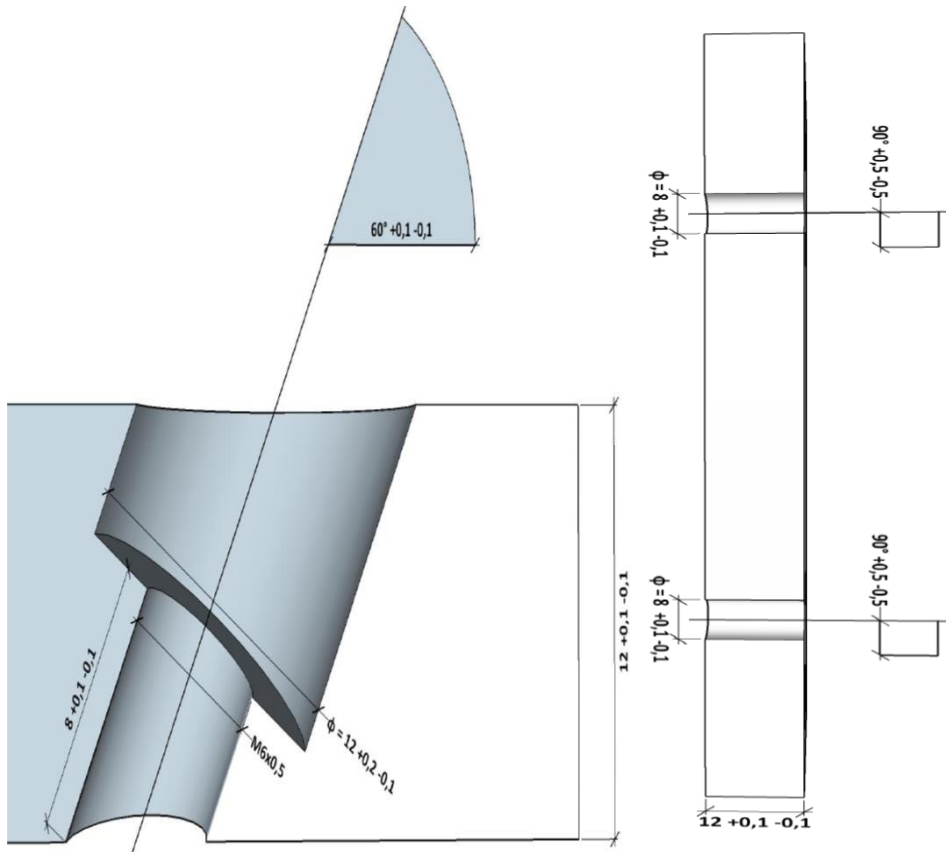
The angle of mounted sensors and the cross section along the axis holes for slit brick fastenings.
